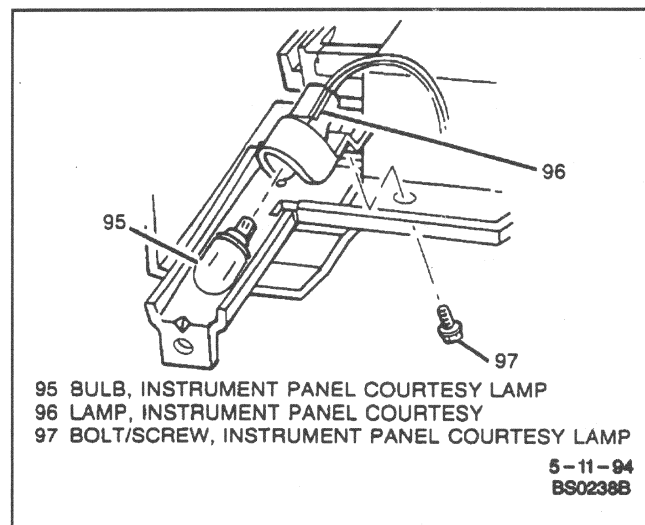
Instrument Panel Courtesy Lamp-(Typical)
